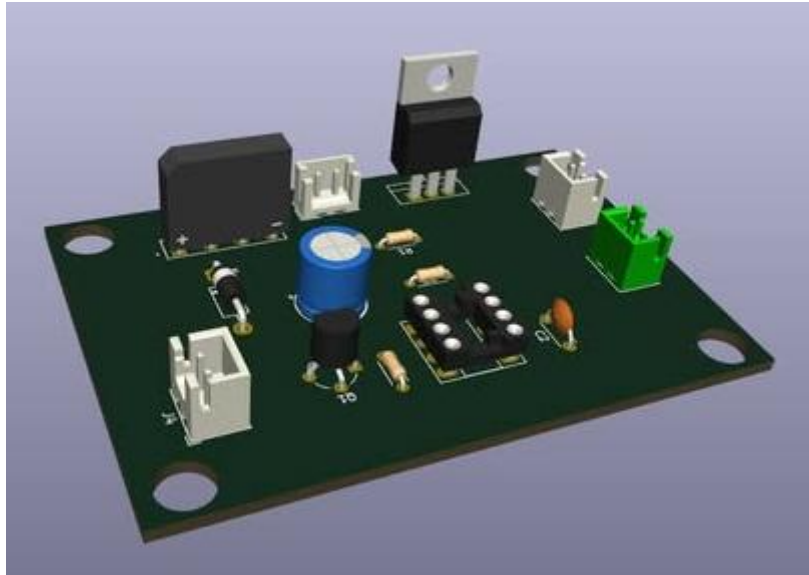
KiCad 3D model of the original PCB layout showing connectors, resistors, capacitor, transistor, relay input, and probe terminals.
